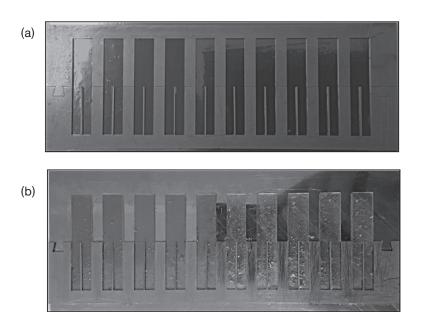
(a) Stainless steel mold for tear strength test specimen fabrication. (b) Tissue conditioners were packed into stainless.
